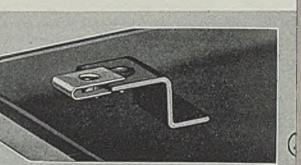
One end of fastener is formed here to shield bolt end completely Fig. 6—Plastic window assembled into frame by spring tension fasteners frees the assembly from dead-tight fastening pressure, resists vibration of aircraft and permits expansion and contraction of the plastic without damage
